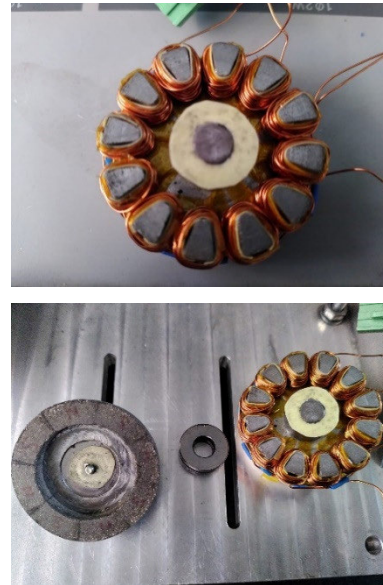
Different steps of SMC stator and motor preparation: stator winding, rotor with bonded magnets, and bearings.
